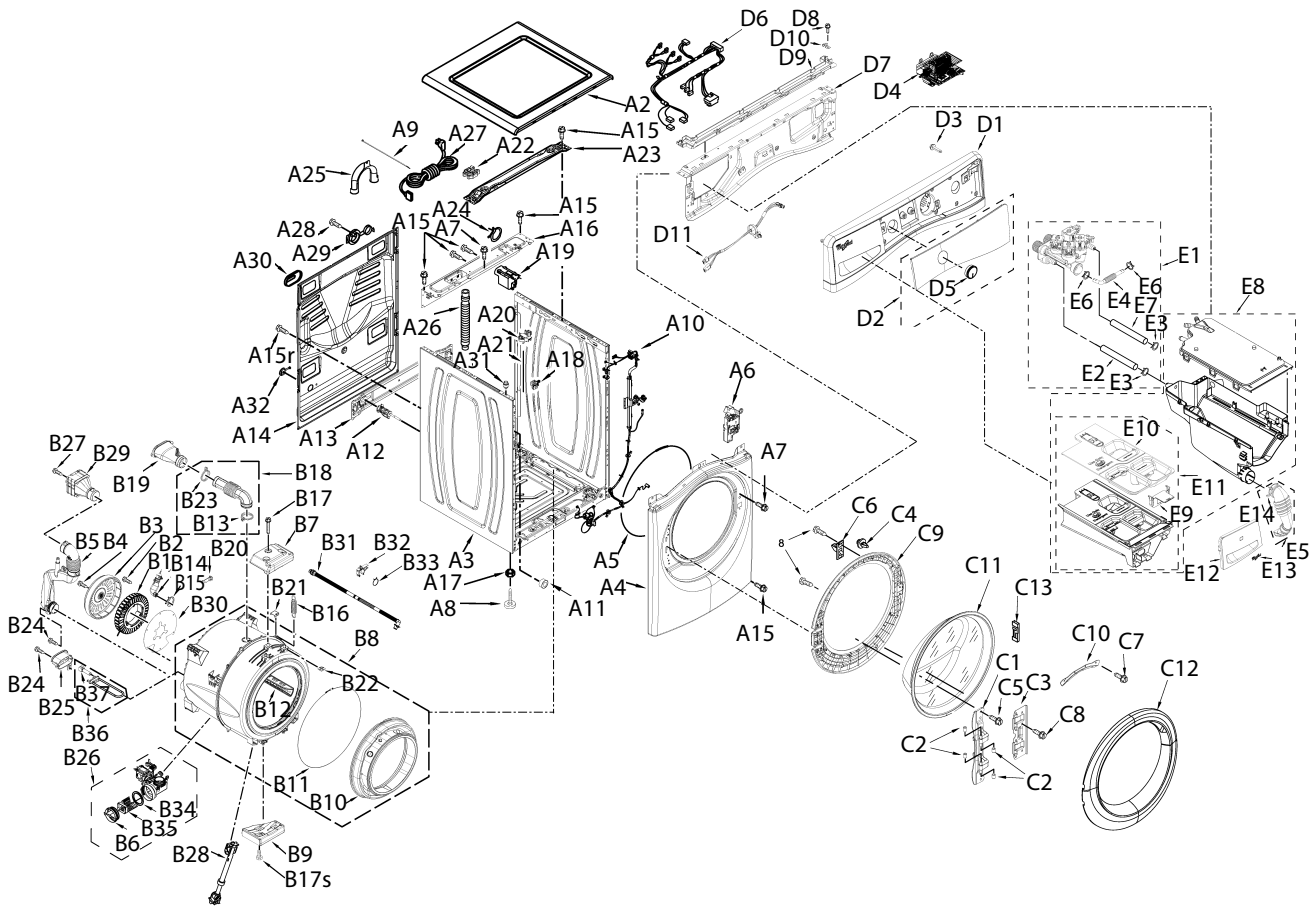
Exploded view drawing of the Whirlpool WFW87HEDW0 washing machine. The letter that precedes the task identifier indicates the subassembly: 'A' is the cabinet, 'B' is the basket, 'C' is the door, 'D' is the control panel and 'E' is the dispenser.
